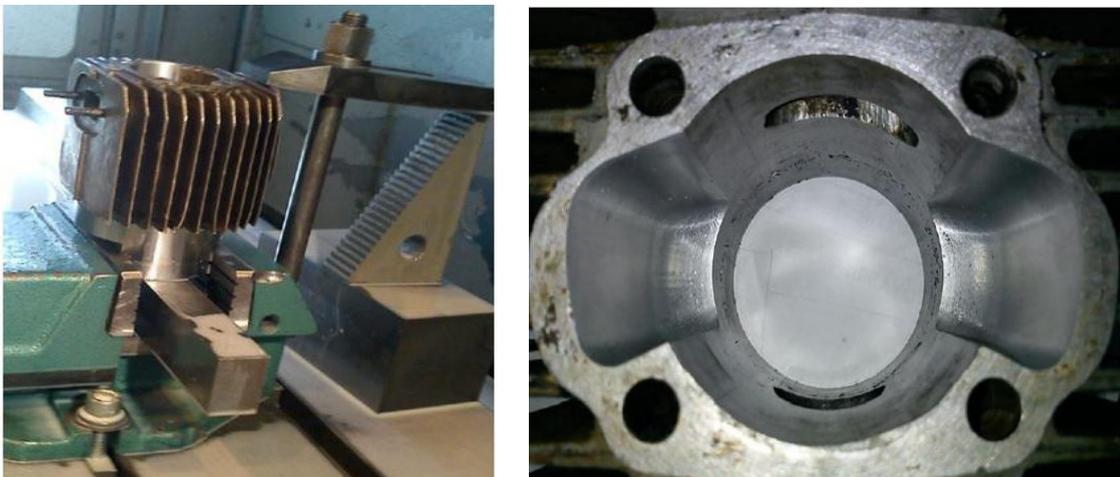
(a) Manufacture of the transfer channels; (b) the transfer channels.
